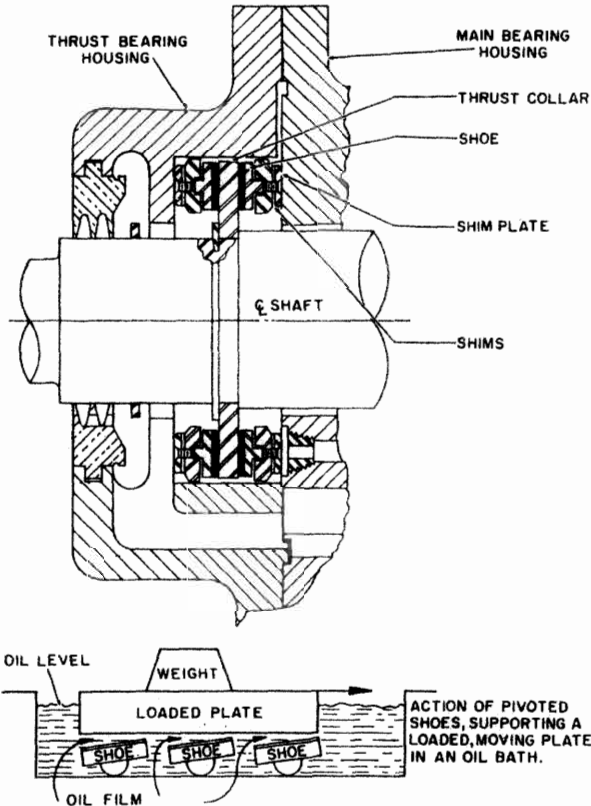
Basic thrust bearing. (Courtesy of Elliott Company)
